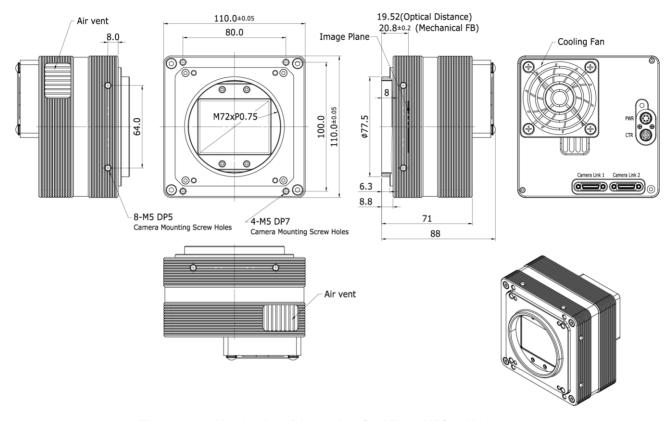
Mechanical Dimension for VP-151MC-5 M72-mount
